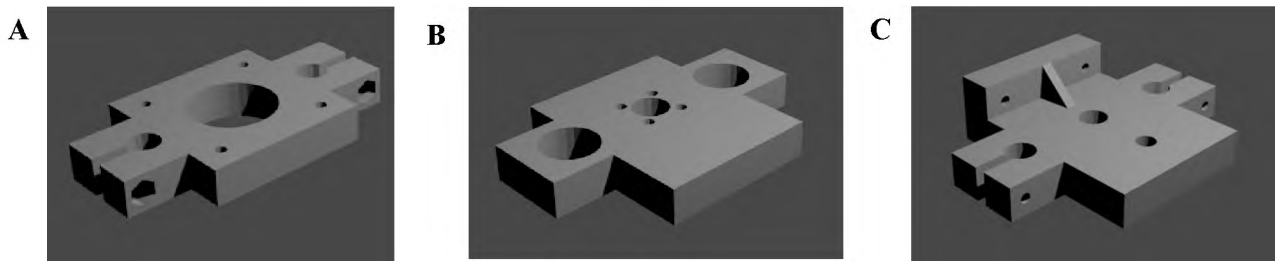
Three-dimensional (3D) printed parts required for screw-driven extruder assembly. A: NEMA 17 stepper motor mount. B: Pneumatic drive piece. C: Syringe holder. Stereolithography files were designed using SketchUp Make (v16.0.1). Images were rendered in Blender (v2.78).
